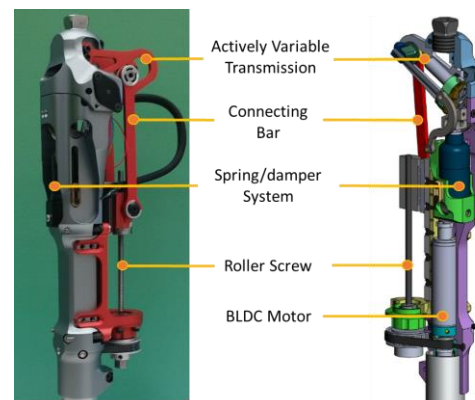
(a) Mechanical design and (b) CAD sectioned view of the hybrid-AVT knee prosthesis. (c)
